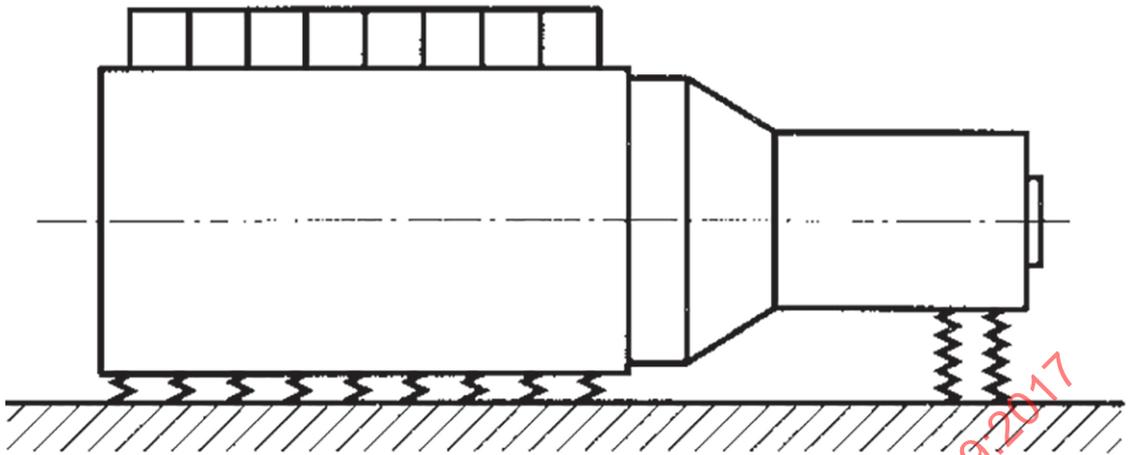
Assembly with flange housing and resilient mounting on the engine and generator
